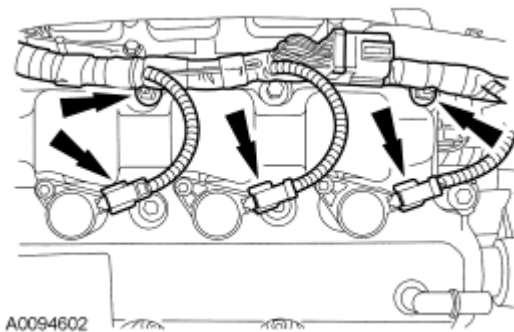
Locating Ignition Coil Electrical Connectors & Wiring Retainers
